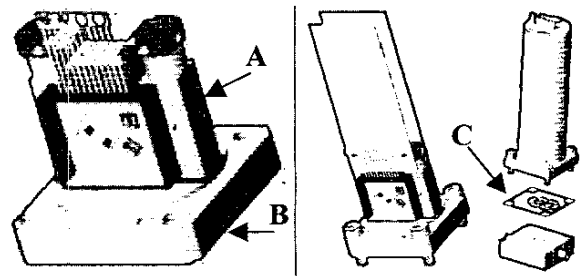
C. CUT-AWAY DRAWING OF A PACKAGED MFC AND PROGRESSIVE ASSEMBLY INTO FINAL PACKAGE (A IS THE CENTERLEG, B IS THE BASE, C IS THE SEAL PLATE).
